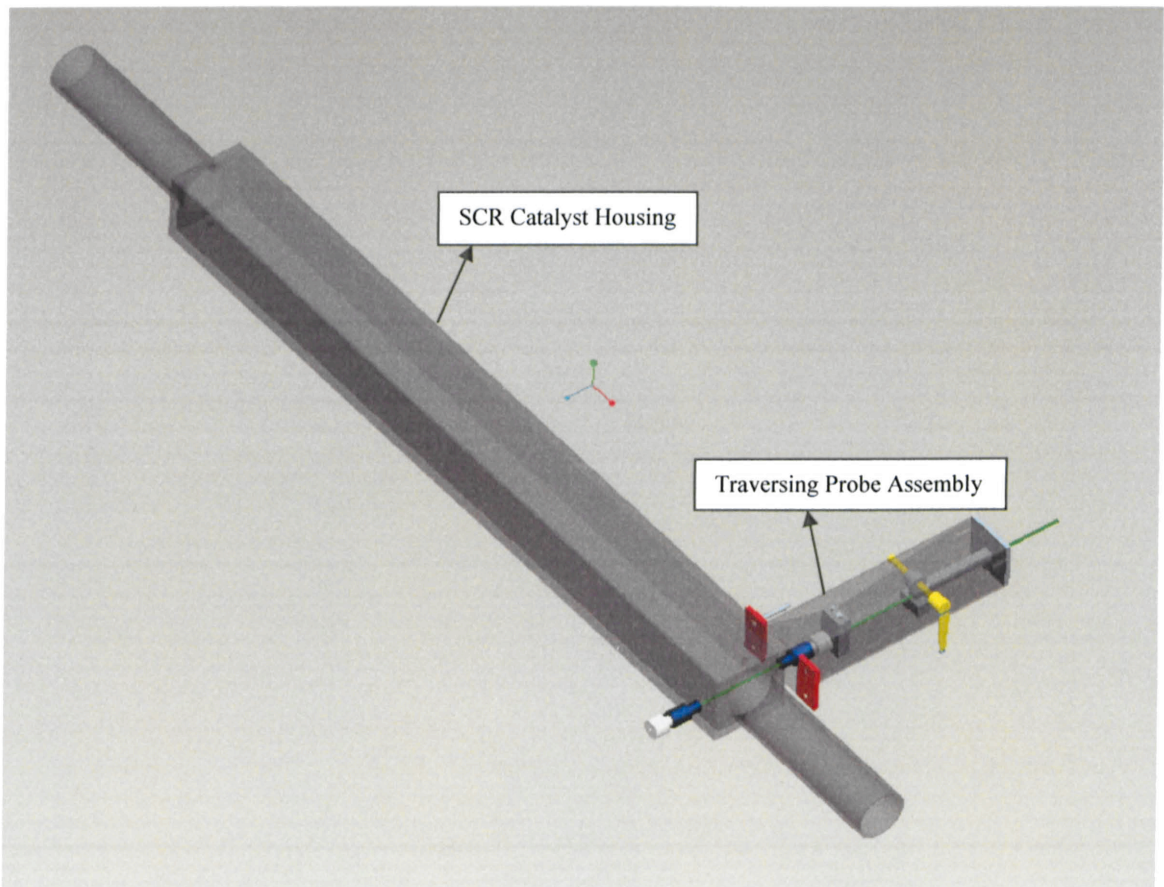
Traversing probe assembly fitted to the catalyst housing
